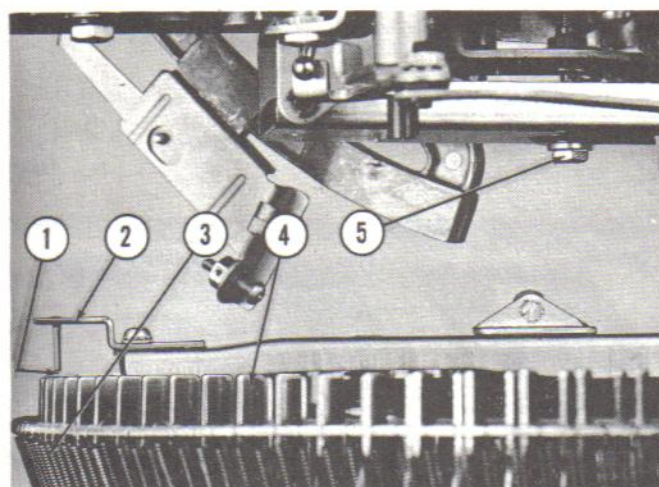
SELECTOR CRANK CLEARANCE ADJUSTMENT
